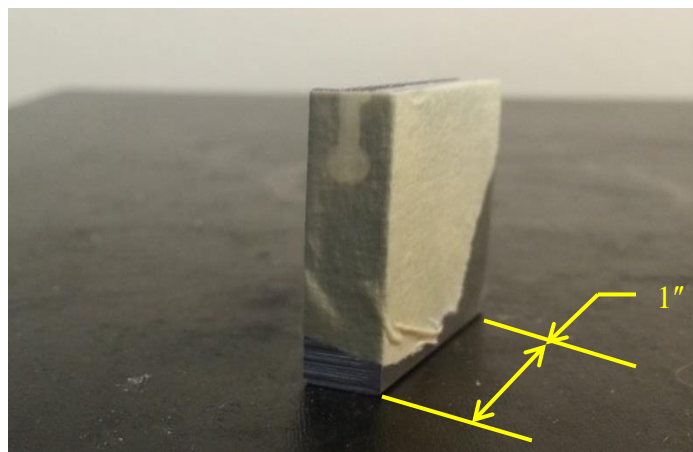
Image showing excess adhesive buildup due to the Alclad 2024-T3 aluminum sheet being wider than the 6061-T6 block.
